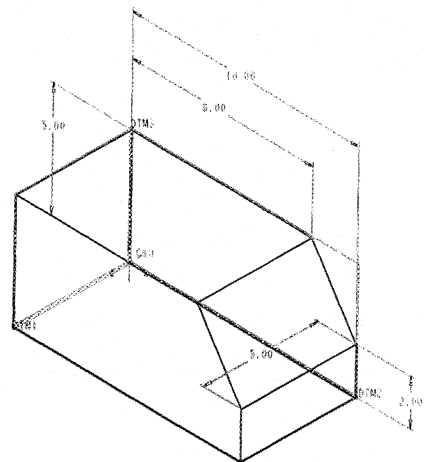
(i) Base Feature with Dimensions Shown and Available to Modify
